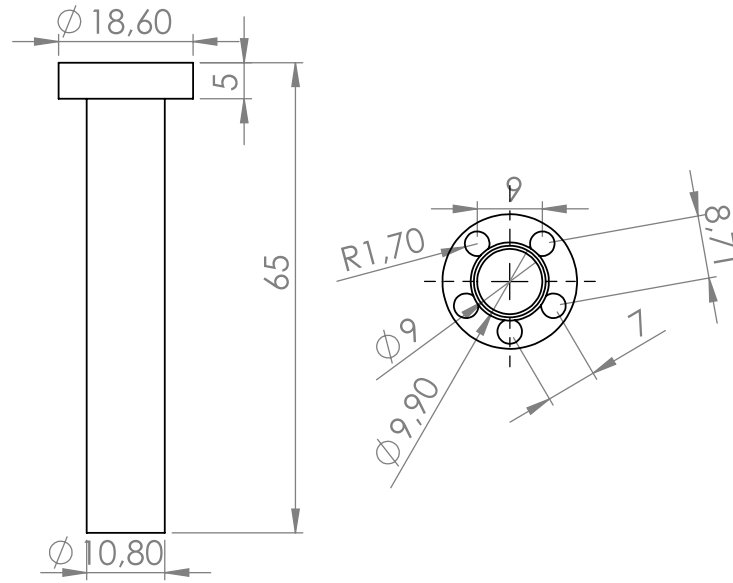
3D-printed supporter design for the flexible PCB (mm).
